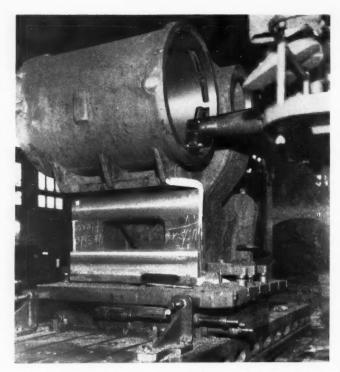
Cylinder and valve barrel facing operations are performed with a continuous feed facing head.
